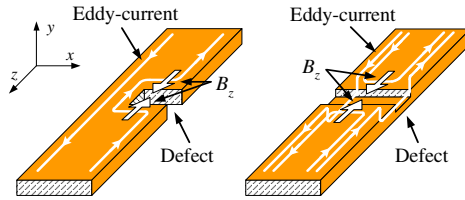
Basic principle of ECT technique for printed circuit board inspection
